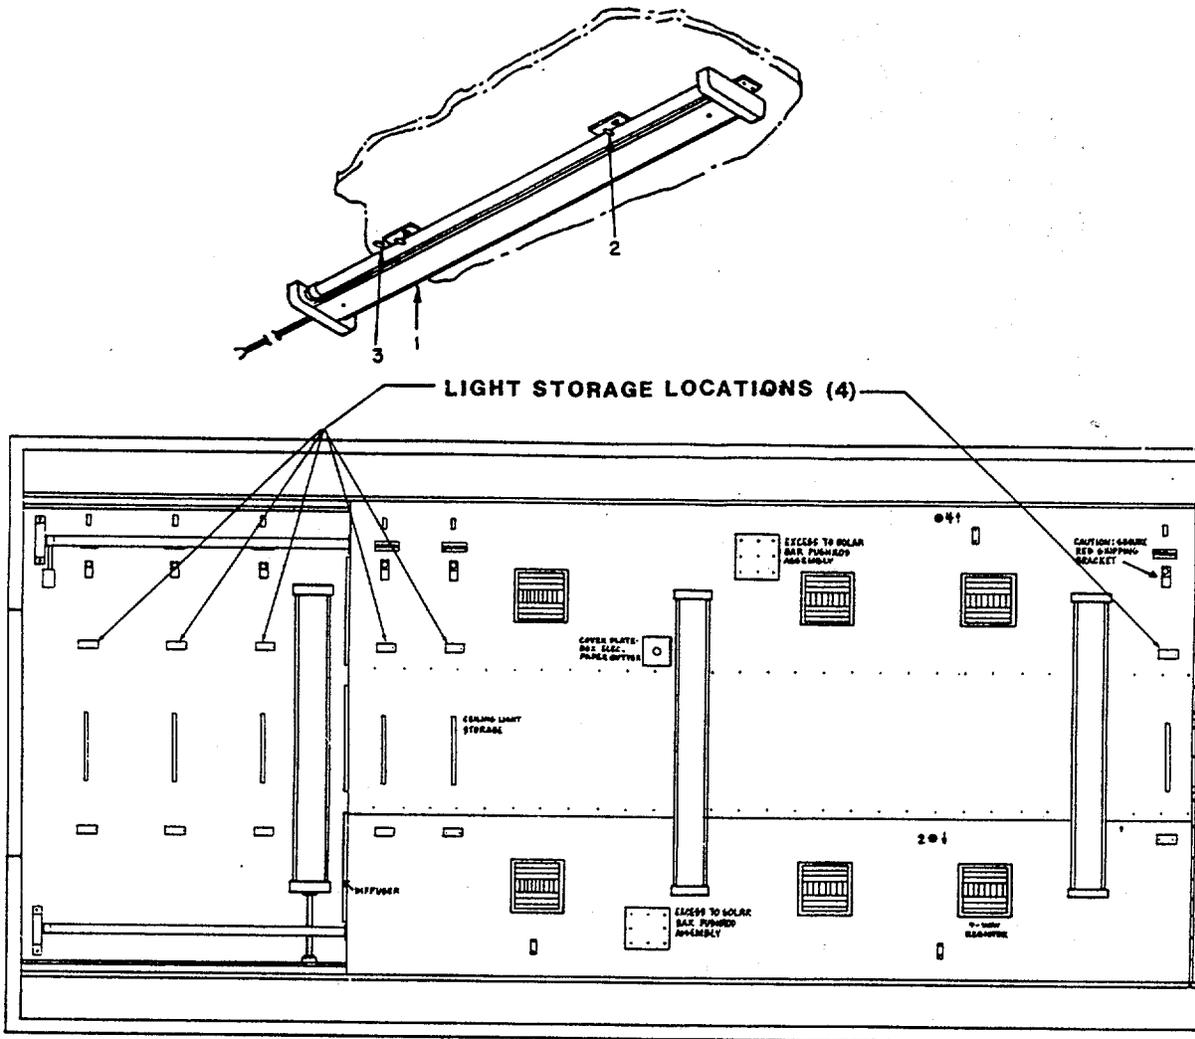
Ceiling Light Assemblies, Stored Location (View Looking up at Ceiling)
